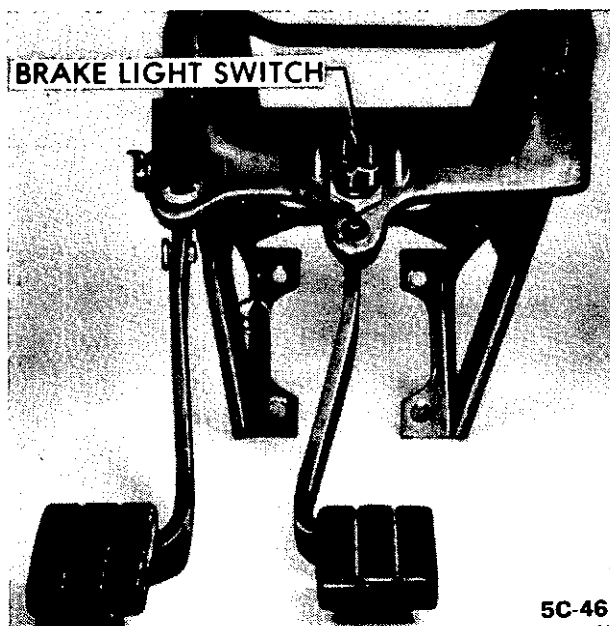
C-46 Brake Light Switch - Opel 1900 and Manta
